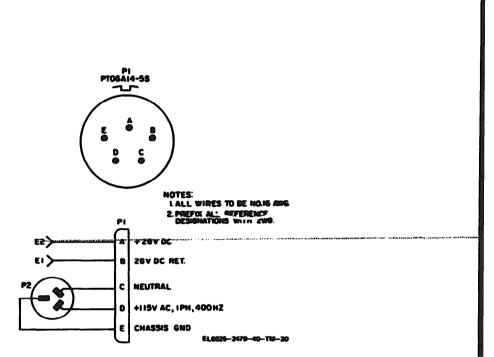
Cable Assembly, Power, Electrical, Branched CX-12724/AYM-8, wiring diagram.
